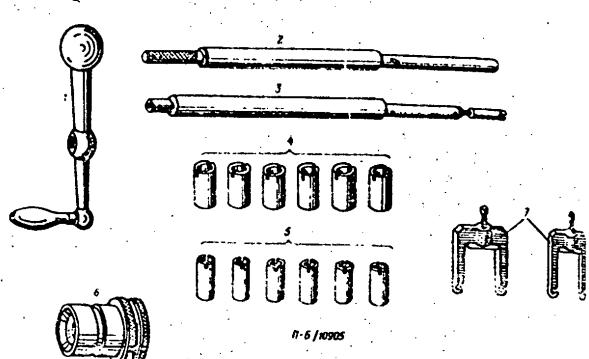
PARTS OF THE USED FOR BORING CONNECTING ROD BEARINGS
